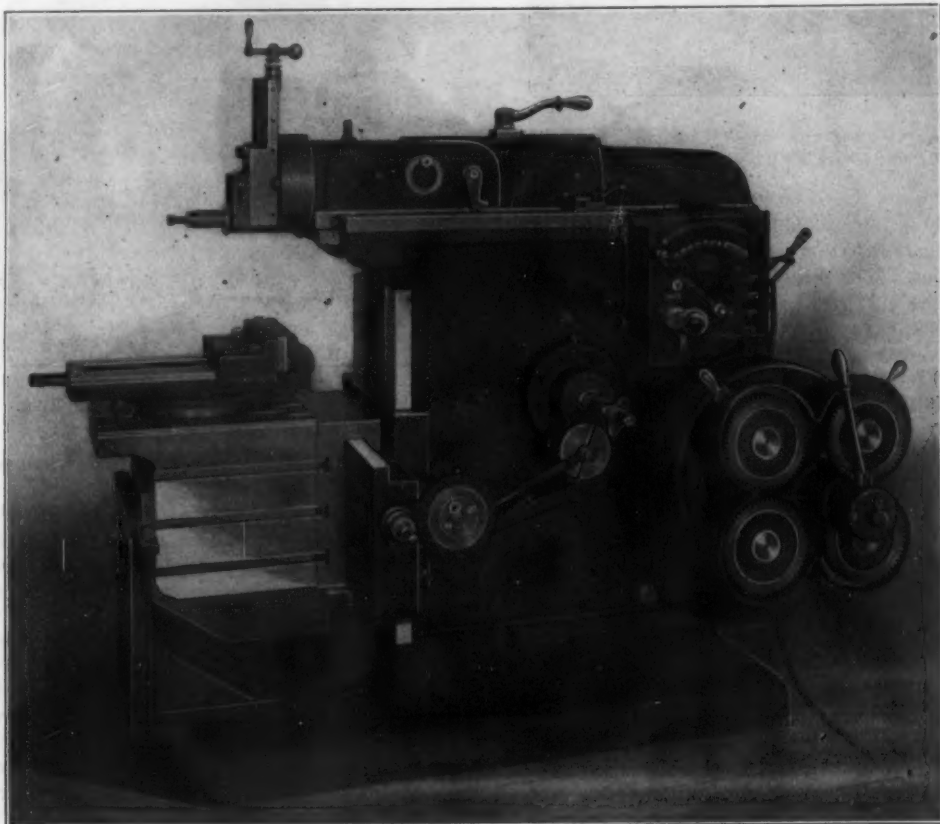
General View of the Machine, Showing the Devices for Manipulating the Speed Changing Mechanism.
